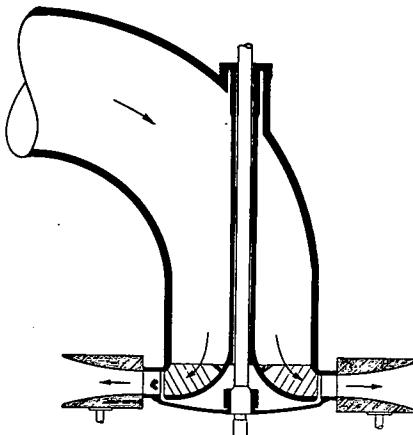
BOYDEN WHEEL AND DIFFUSER
